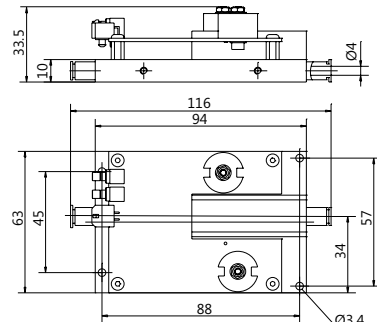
Outline drawing of DP-SP series driver with general purpose pad
